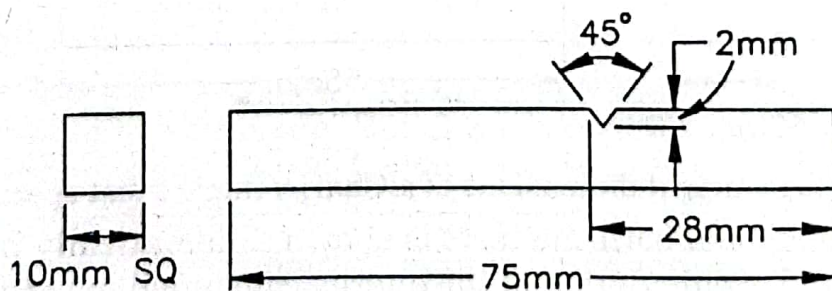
Standard dimensions of an Izod impact test specimen.
